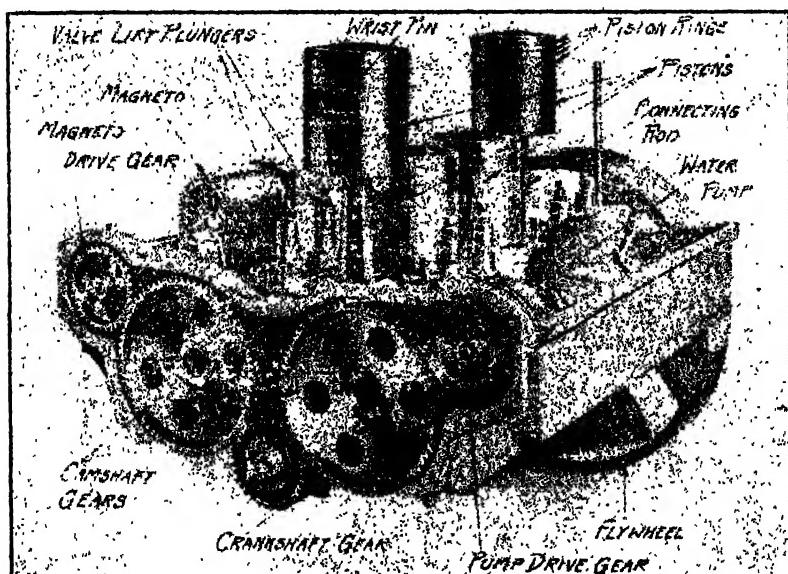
View of Automobile Engine with Cylinders Removed to Expose Pistons and Connecting Rod and with Timing Gear Case Taken Off to Expose Gearing.
